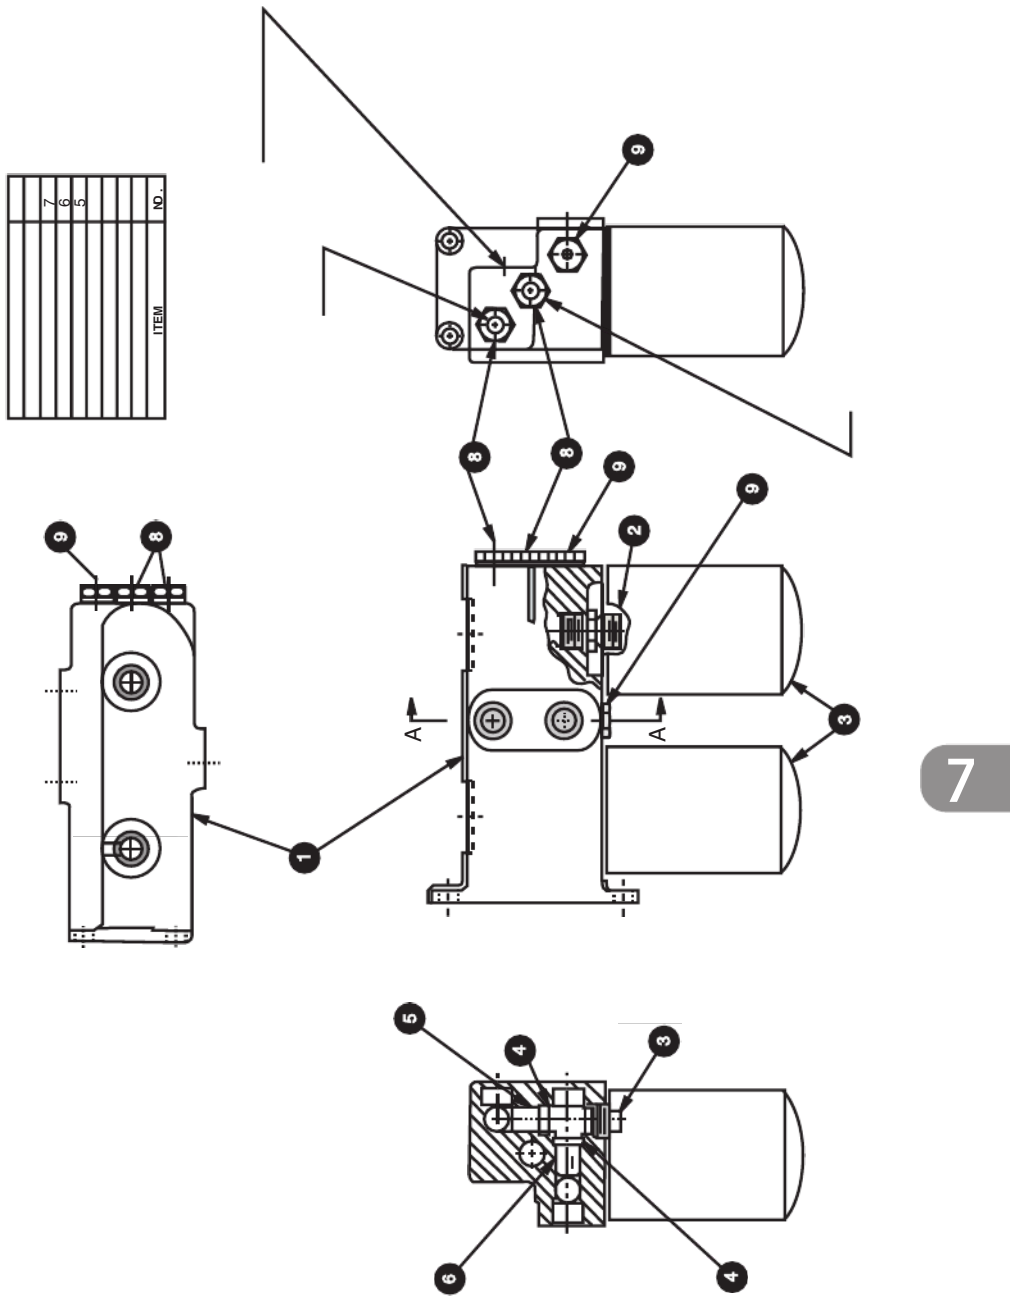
Fuel Filter Assembly (For 70/90MAC “Platform Style Engine”).
